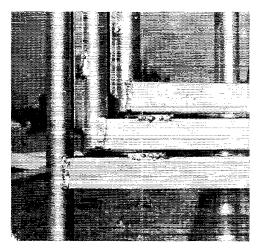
Detail view showing the welding of the crossbraces to the legs. This view also shows the steel-angle slides of the top and middle sections. The welds visible between the tower sections are at the ends of diagonals (same material as the crossbraces) which serve as rests for the two top sections when the tower is completely telescoped.
